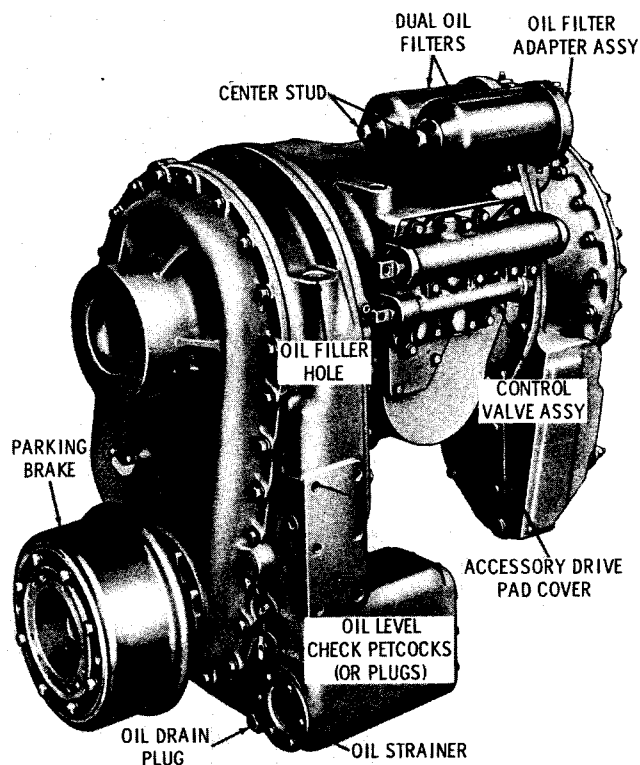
Model CRT 5630 transmission, remote mount—right-rear view
